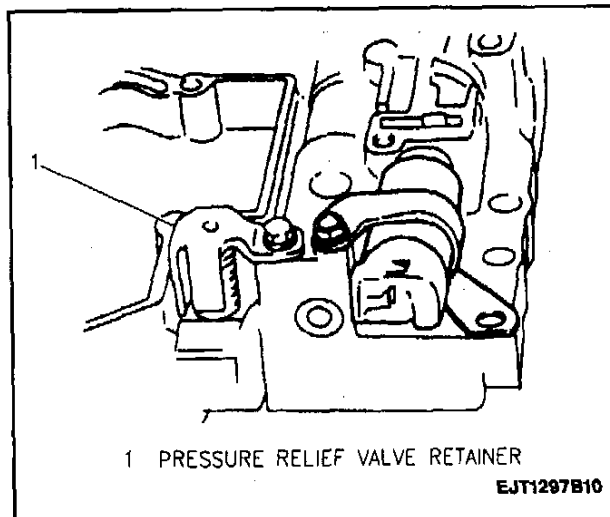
Pressure Relief Valve Retainer (03-72LE, 4-Speed)
